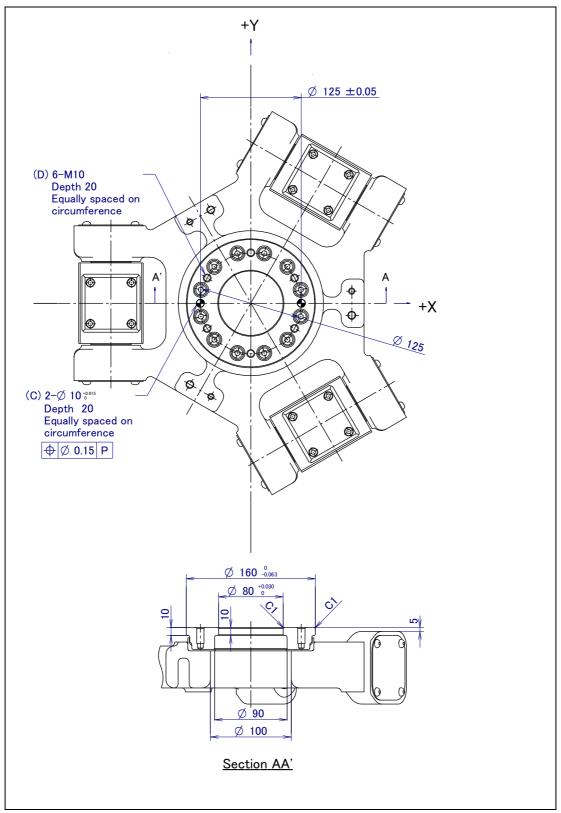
(d) End effector mounting face (insulated ISO flange)
